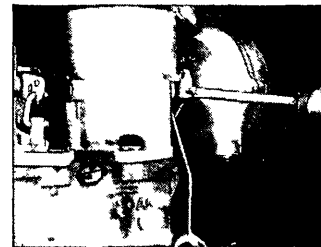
Tighten choke lever screw. Be sure linkage does not bind in any position. Then make fast idle, unloader and lockout adjustments
